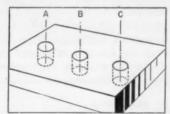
In grinding three holes to size, A and B are roughed to within .001"-.002", and C within about .005". Using a freshly charged mandrel, C is finished to size, thereby breaking down the high points on the tool. A and B may now be safely ground to size.
